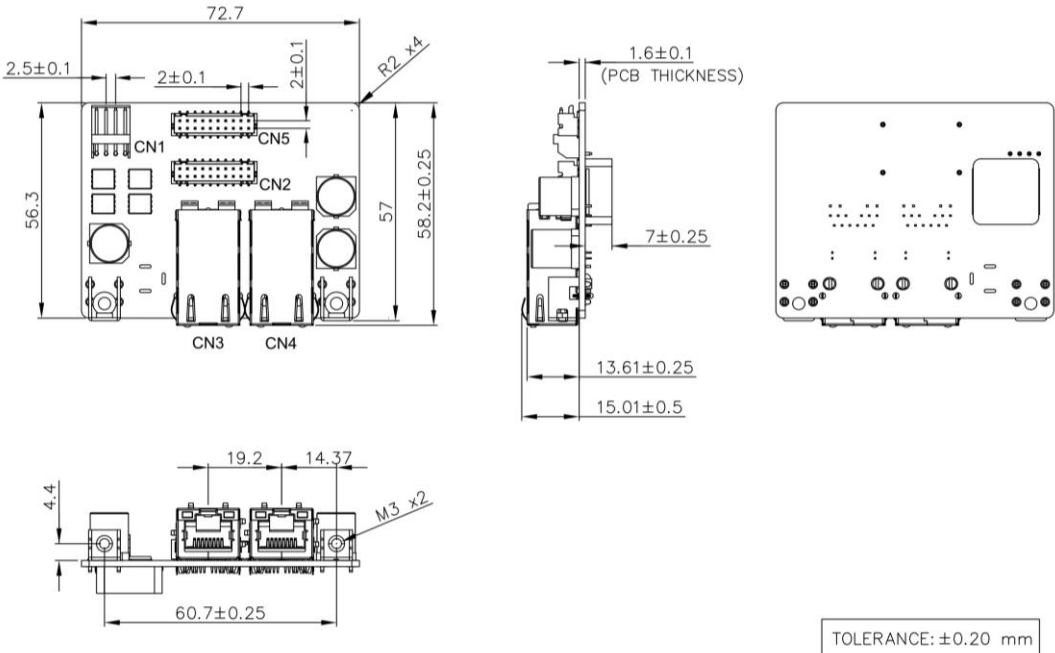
Mounting Hole Daughter Board Drawing - 4Pin Header (EGPL-G2P1-C1/W1)
